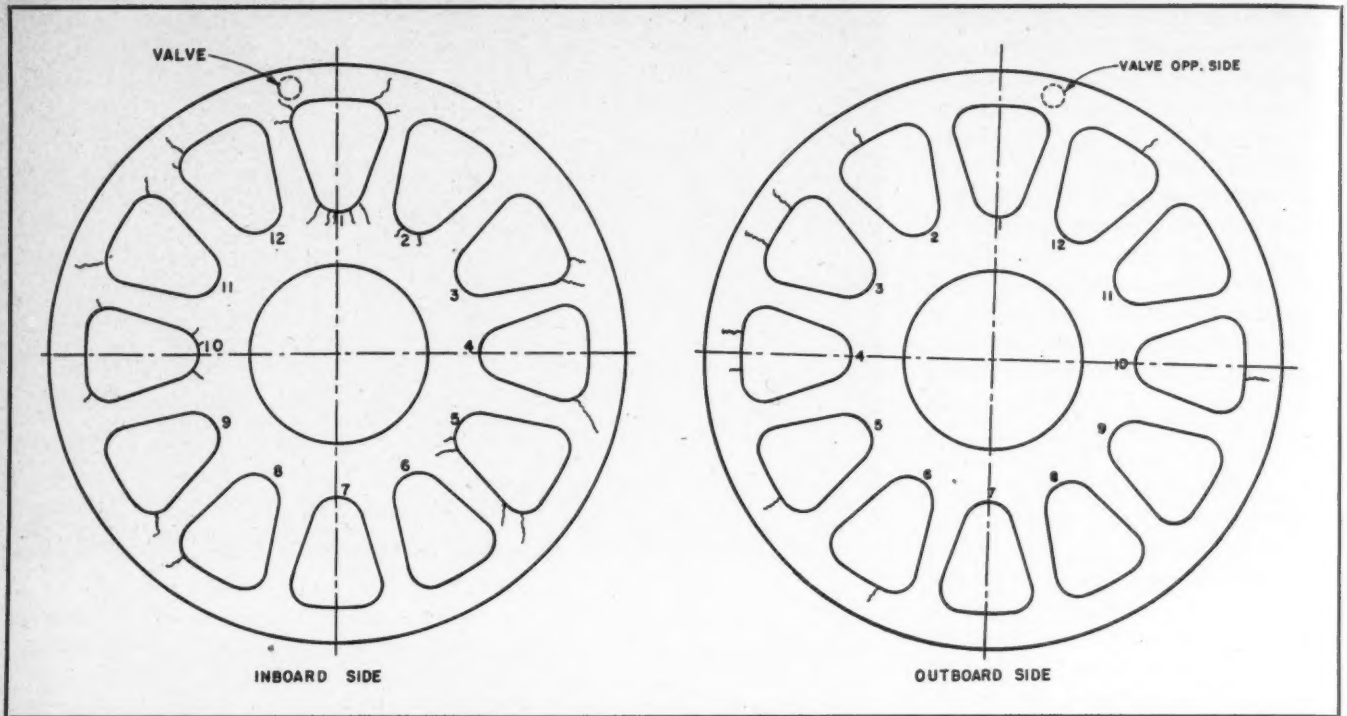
Diagrammatic views of inboard and outboard sides of an aircraft wheel showing location of roll test failures.
